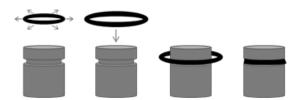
A simple assembly method used in [14]–[18]. Since this method requires a large elongation this is not suitable for stiff packings.
